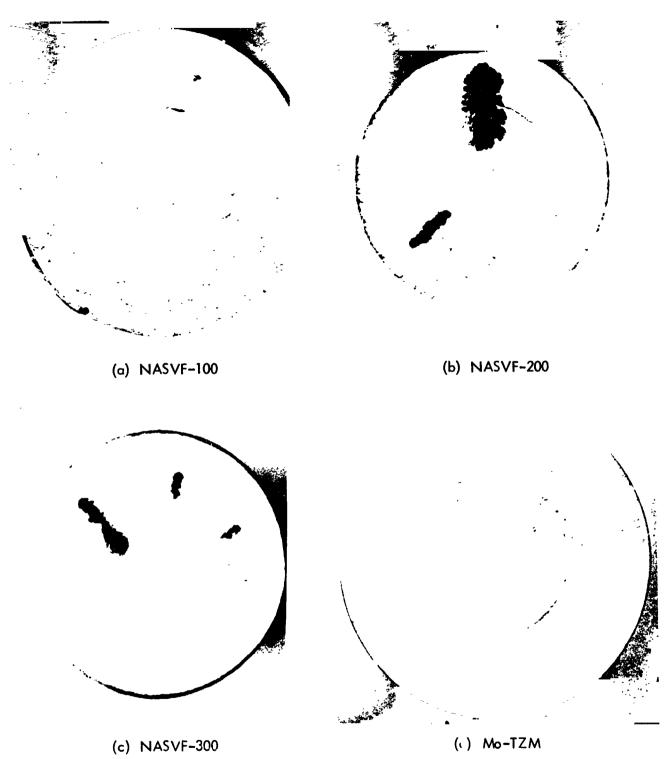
Surface Ground End Welds Illustrating Defect Free N/SVF-100 and Mo-TZM and Radial Cracks in NASVF-200 and NASVF-300
